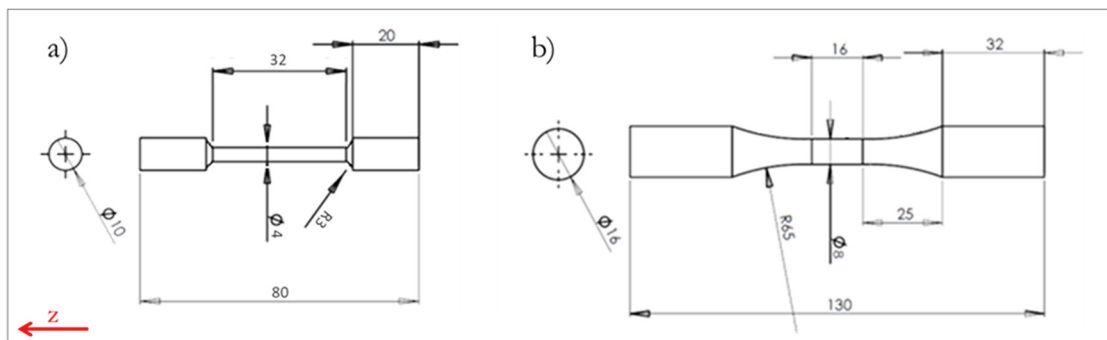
Specimen geometry for (a) tensile test and (b) fatigue test.
